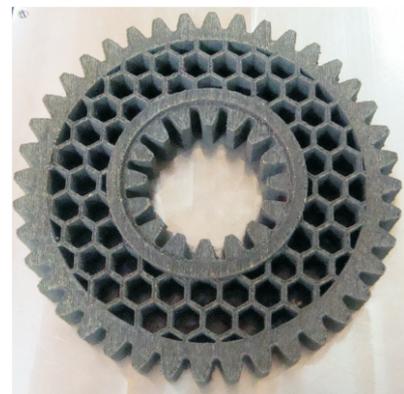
External and internal geared geometry with honeycomb core.
